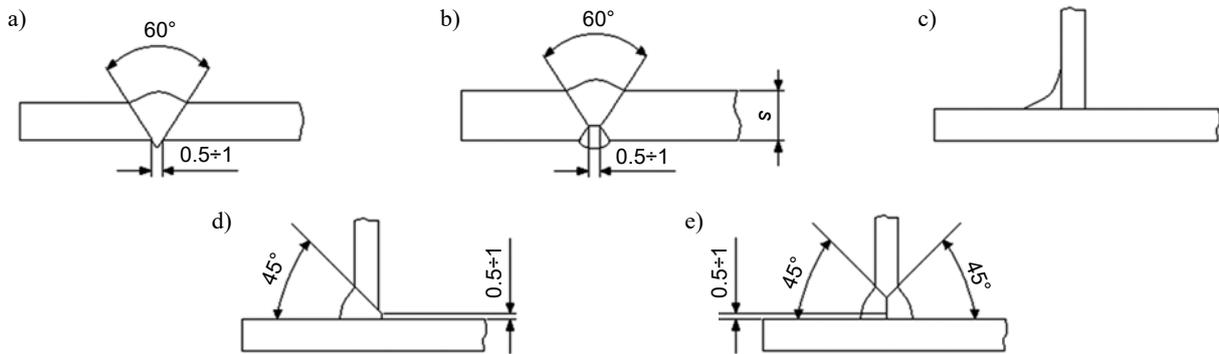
Examples of joints used: a) V-joint, b) X-joint, c) fillet joint, d) HV-joint, e) K-joint (Sikora, 1993)
